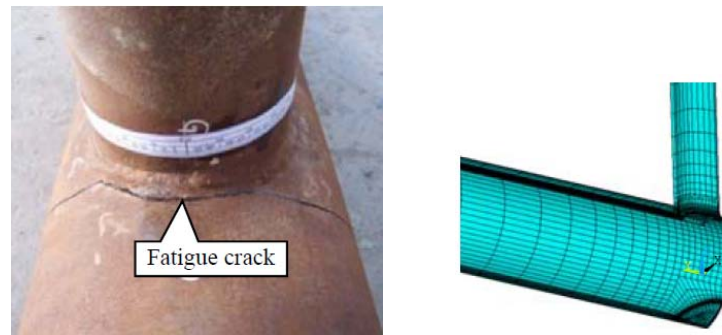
Fatigue Study in Welded Joints [6]
